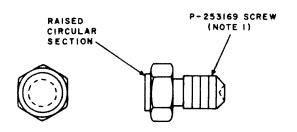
Normal Post Spring Assembly Mounting Screw With Raised Circular Section
